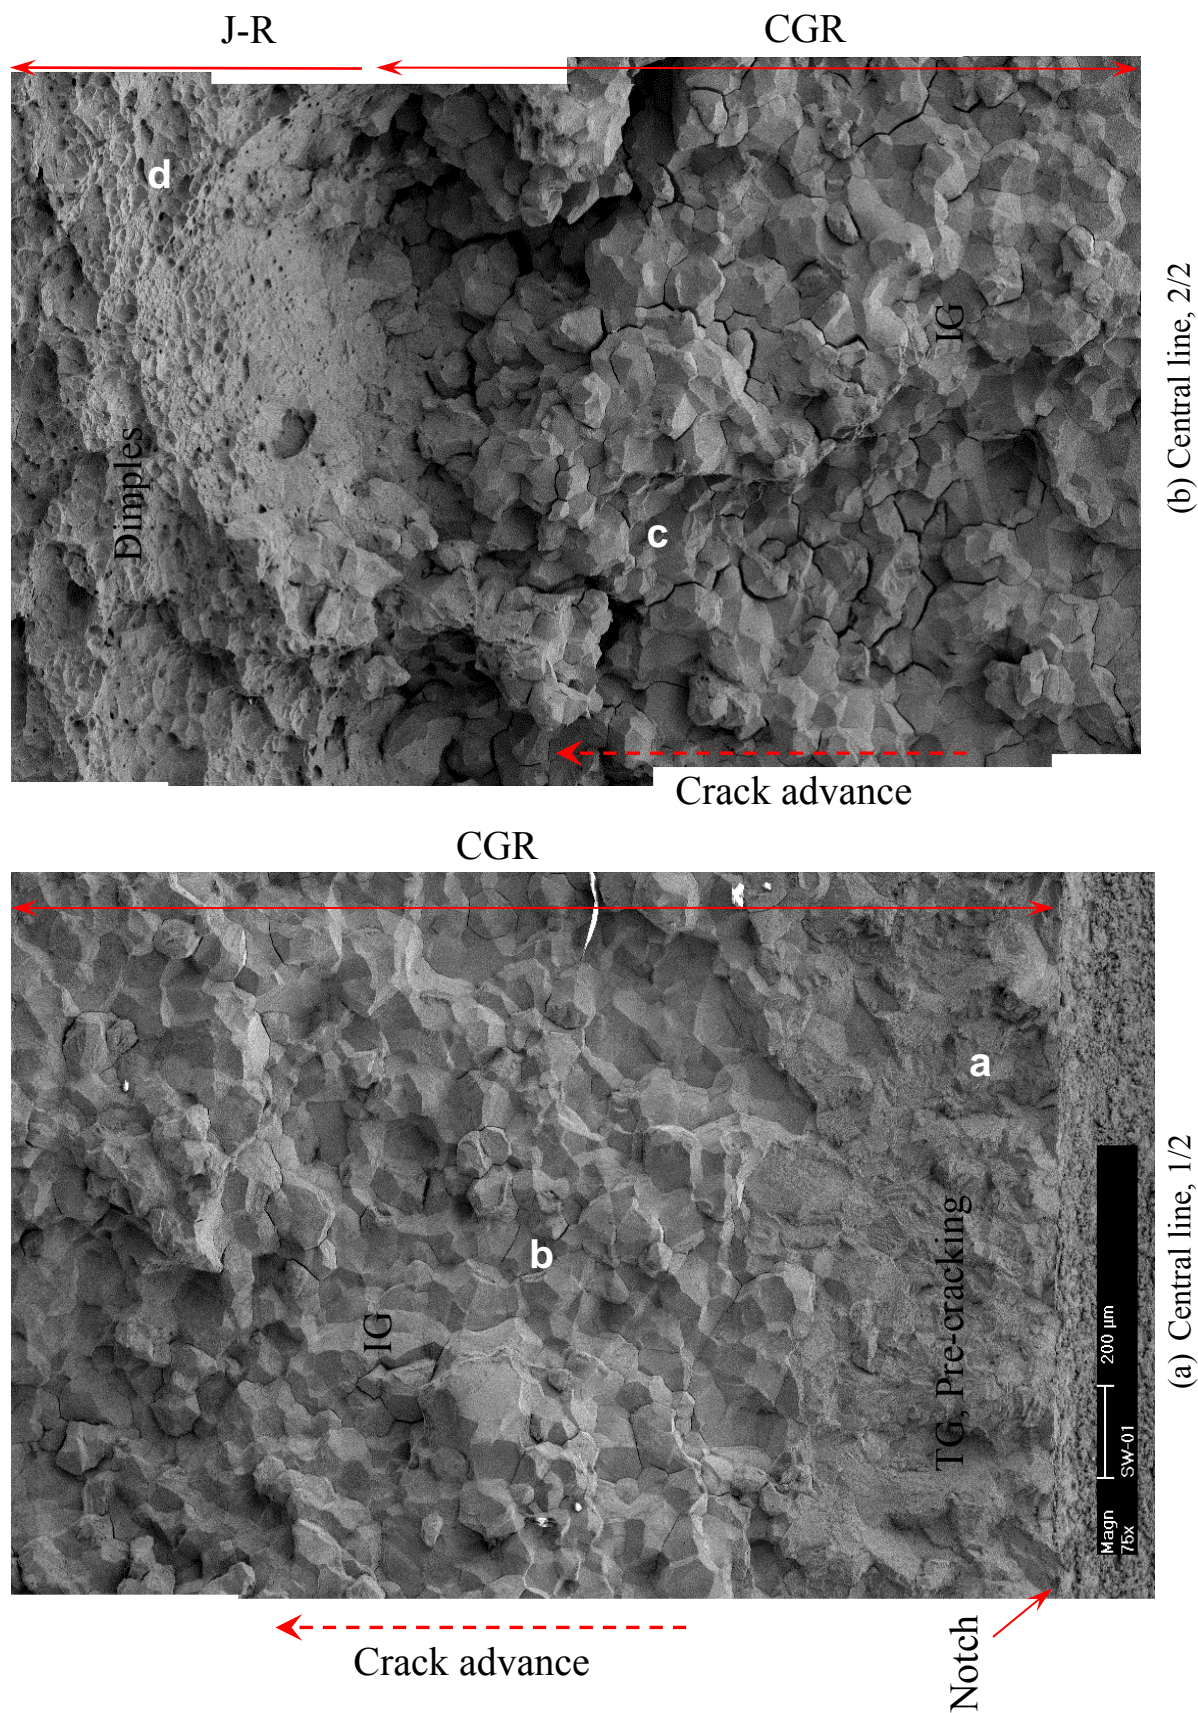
Fracture surface of specimen SW-01 along the sample central line.
